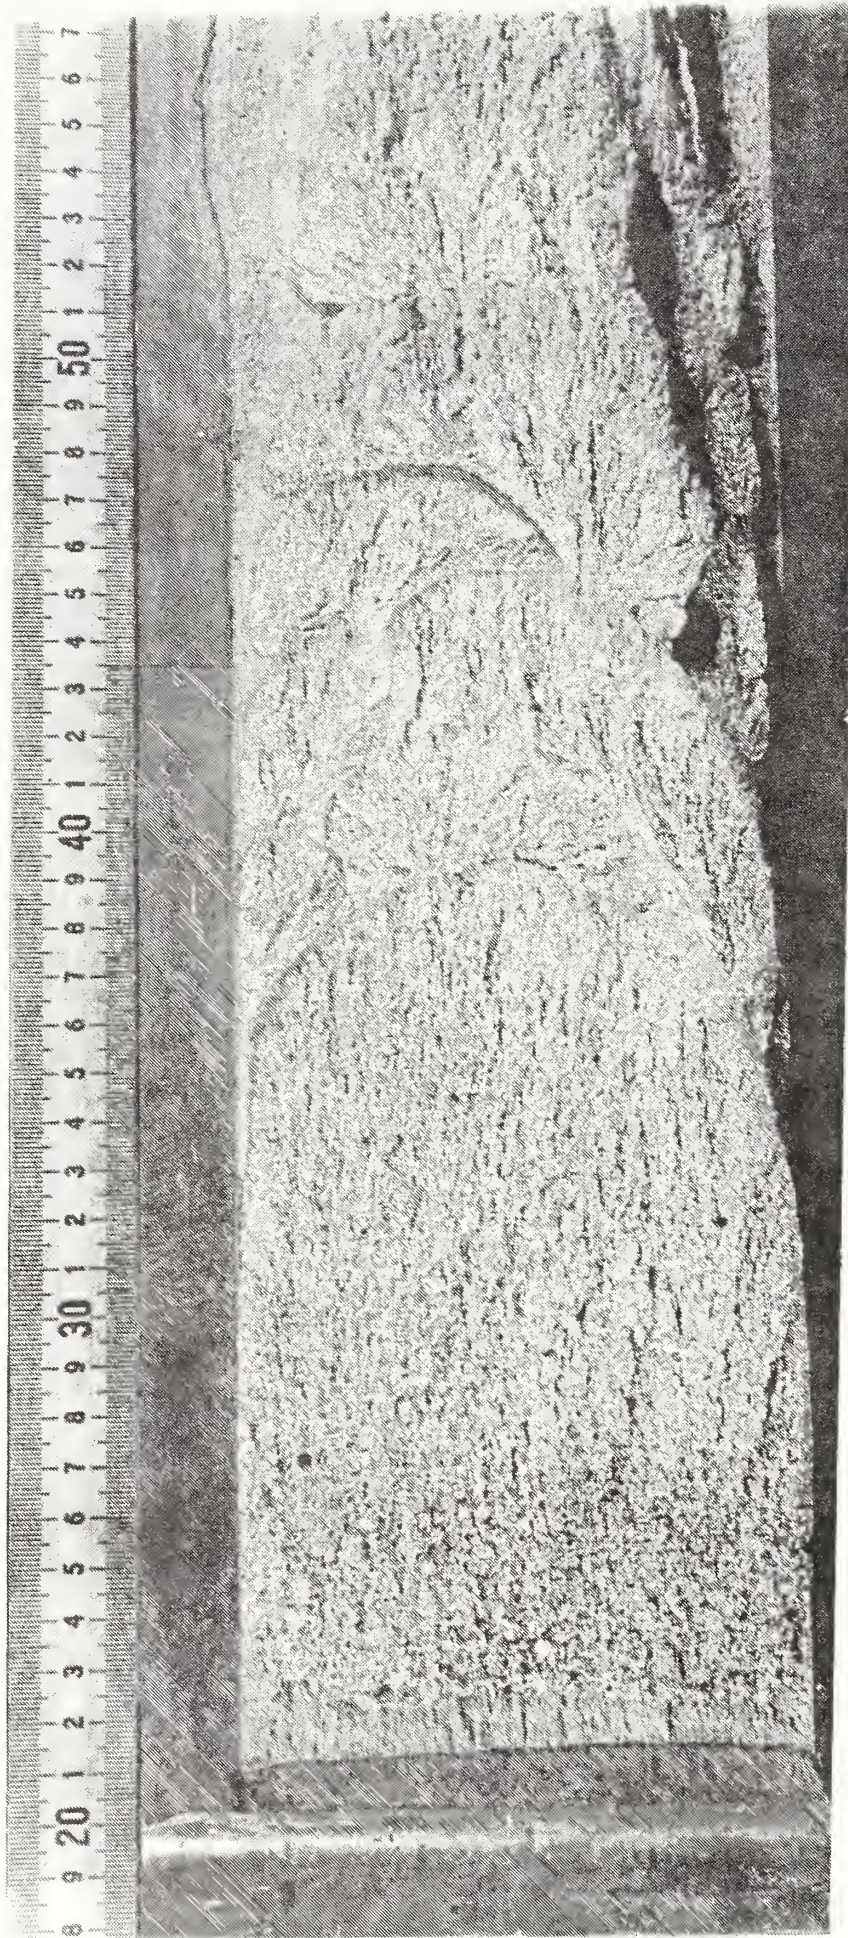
Fracture surface of WP-2.6 showing the first arrest location ($\alpha = 45^\circ$ rosettes are on the lower side of the specimen).
